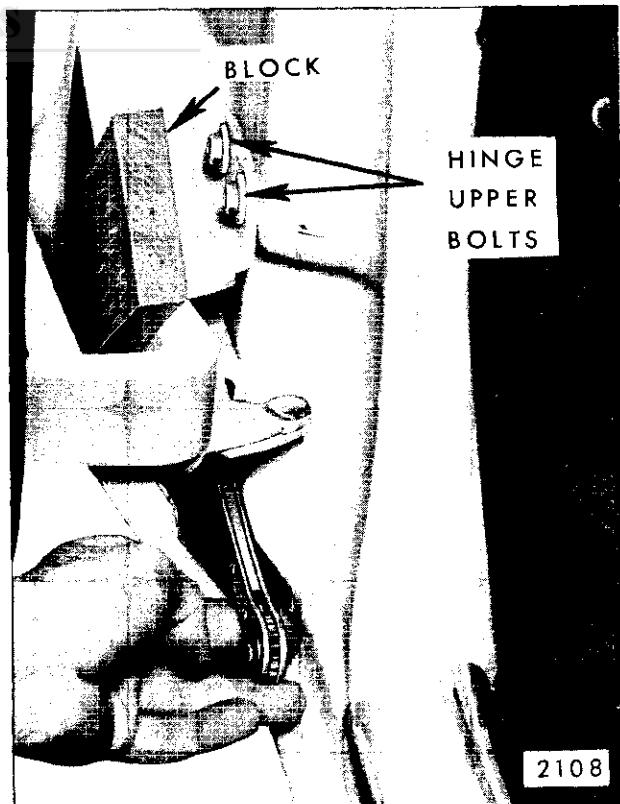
Front Door Hinge Removal - "E" Styles
